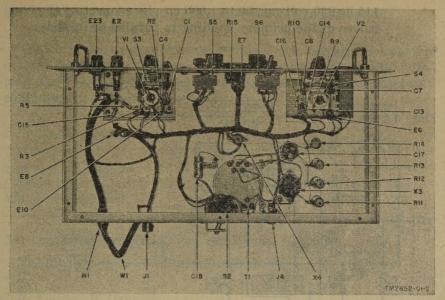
(Added) Panel and chassis assembly, Crystal Impedance Meter TS-683A/TSM, bottom view, cover plate removed.
